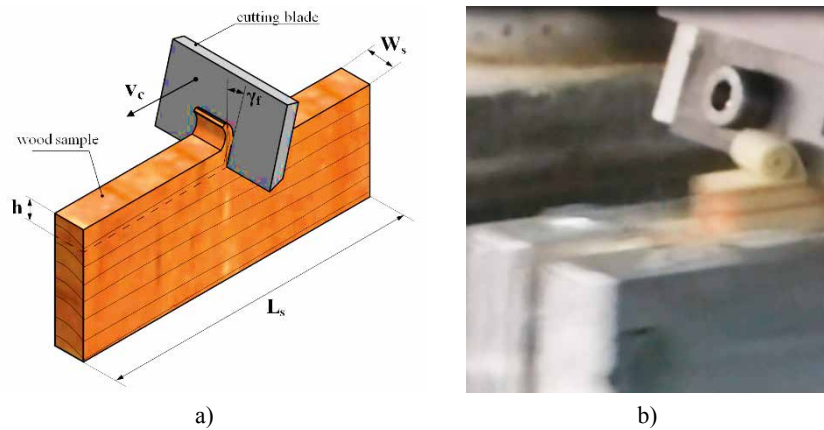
Orthogonal cutting process on sliding microtome: a) process kinematics and b) formed chip while cutting. Legend: L_s – sample length, W_s – sample width, h – uncut chip thickness, v_c – cutting speed
